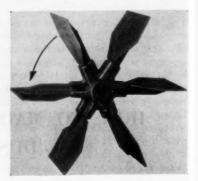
Radial blade paddle wheel centrifugal fan impeller.
